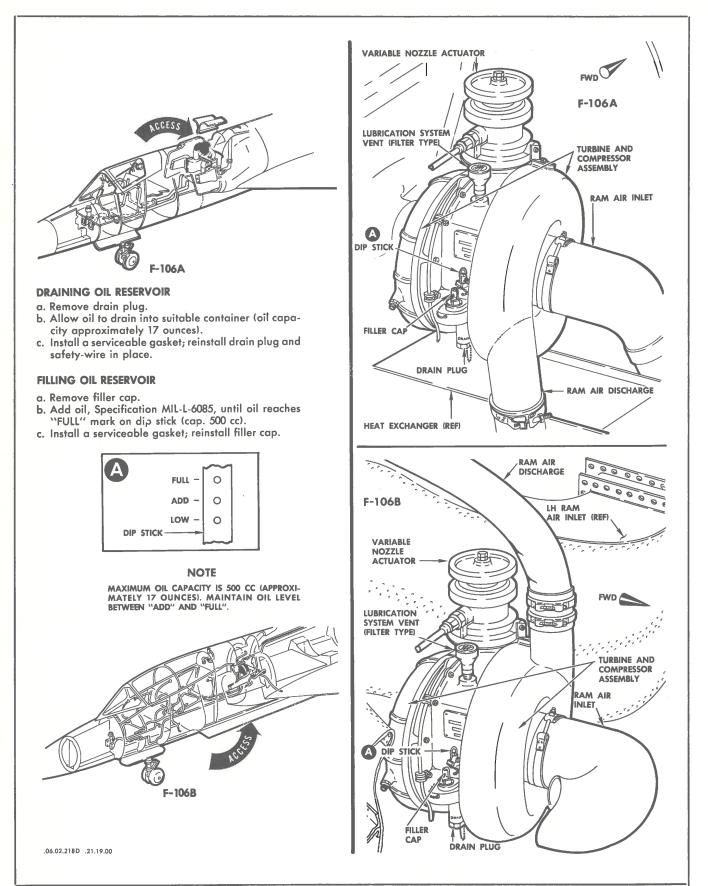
Servicing Refrigeration Unit Turbine and Compressor Assembly
